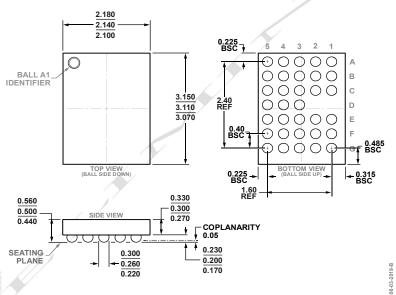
33-Ball Wafer Level Chip Scale Package [WLCSP] (CB-33-1) Dimensions shown in millimeters
